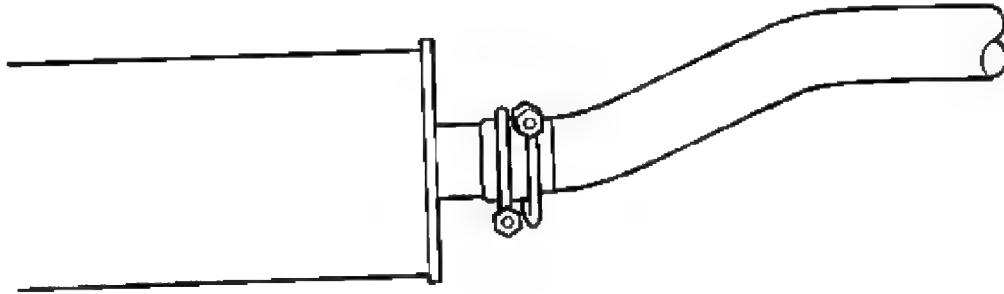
View Of Catalytic Converter Assembly Outlet Pipe Clamp
